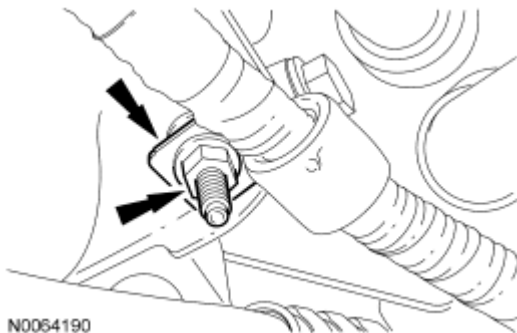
Removing Nut & Wire Harness Bracket From Oil Pan Stud Bolt
